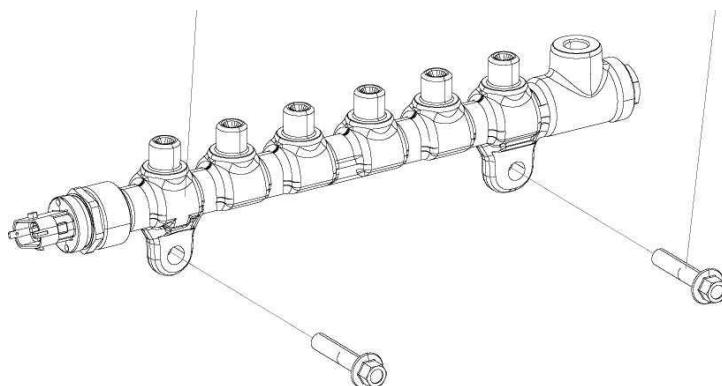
Drawings of analysis of the common-rail tube assembly
